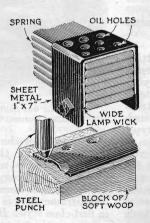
Ingenious spring oiler made from a strip of sheet iron and lamp wick
